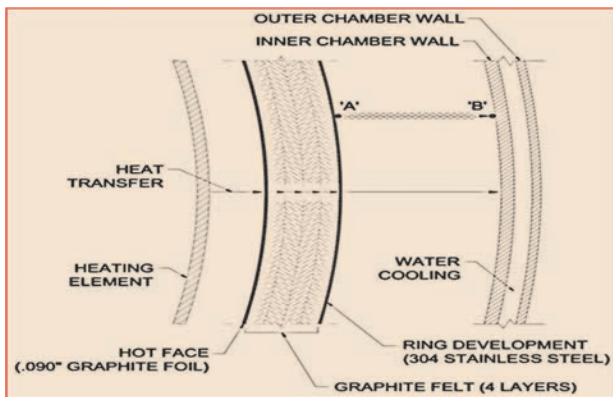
Schematic of furnace wall cross section: Radiation heat transfer from ring wall “A” to cold wall “B” largely contributes to heat loss within the furnace hot zone.
